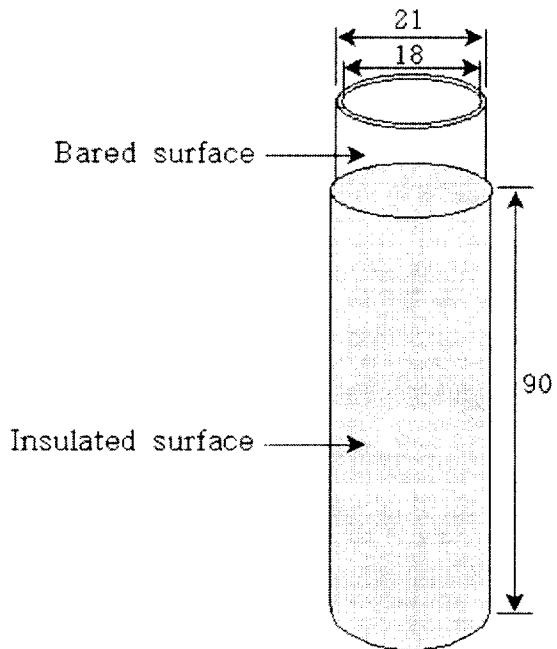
Dimension of mild steel specimen with lining(unit : mm)
